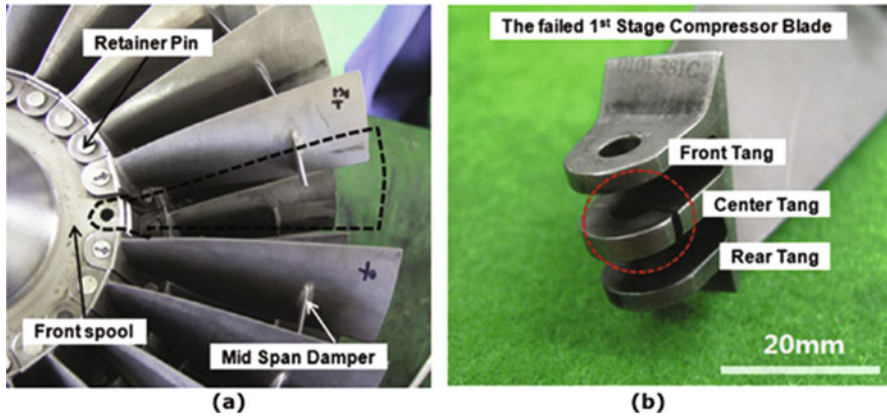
(a) Failed compressor blade and (b) detailed view of the fractured pinhole lug (Lee et al. 2011)
